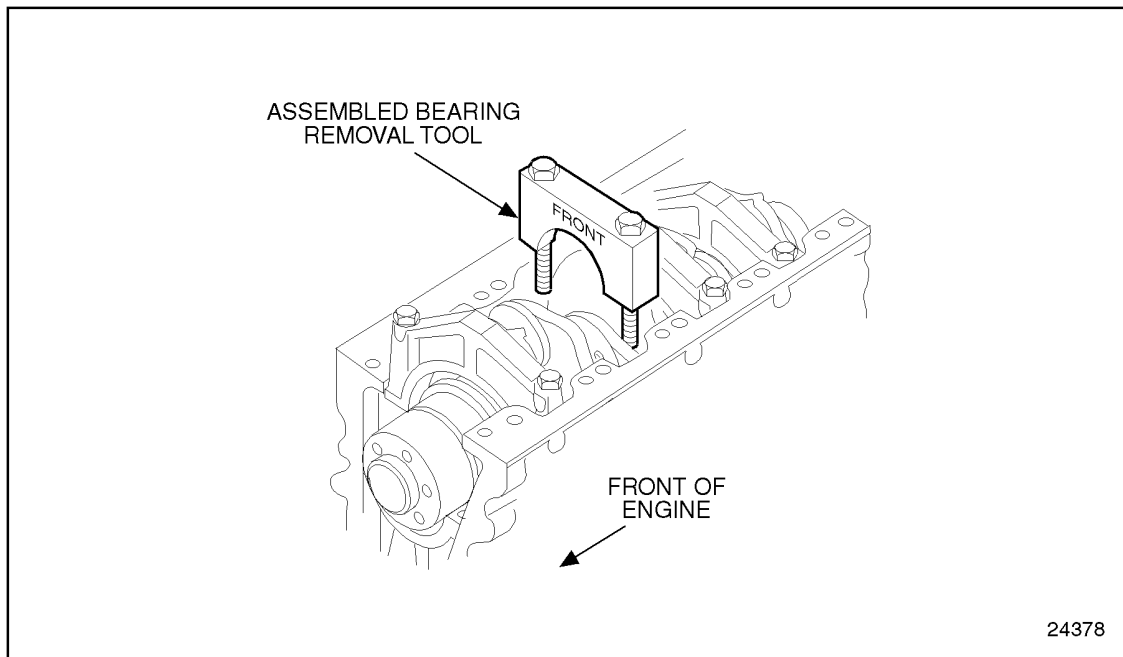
Upper Main Bearing Shell Remover Tool Installation
